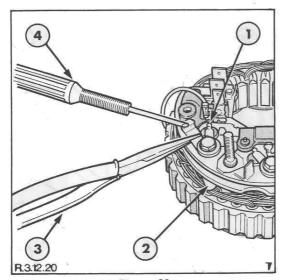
Soldering and Unsoldering Diode Connections Using Pliers as a Heat Guard
